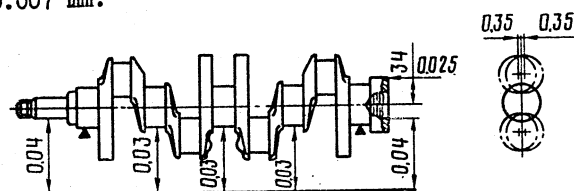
Permissible Runout of Basic Crankshaft Surfaces
